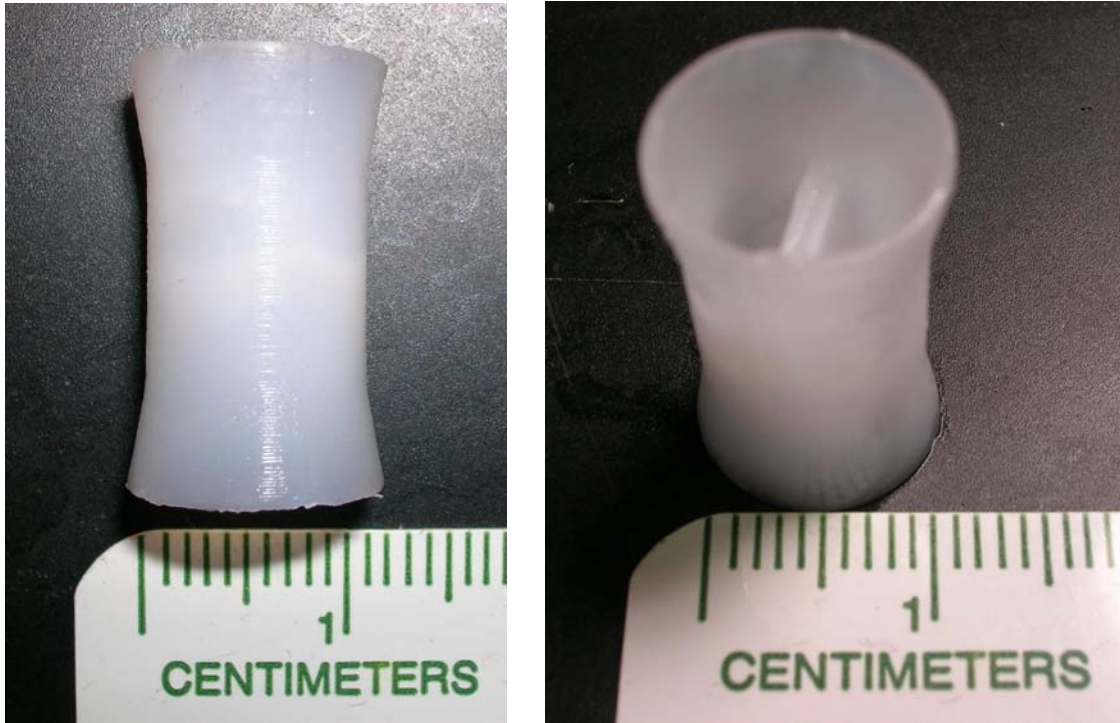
Side view of the valve, revealing its flared inlet and outlet for better circumferential sealing (left). Isometric view of the valve; separate leaflets are distinguished by the orifice line (right)
